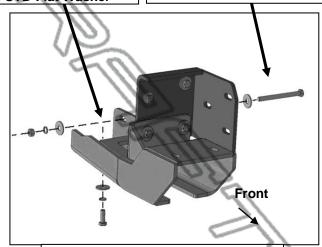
Attach driver/left Support Bracket to bottom holes in frame and Mounting Bracket
